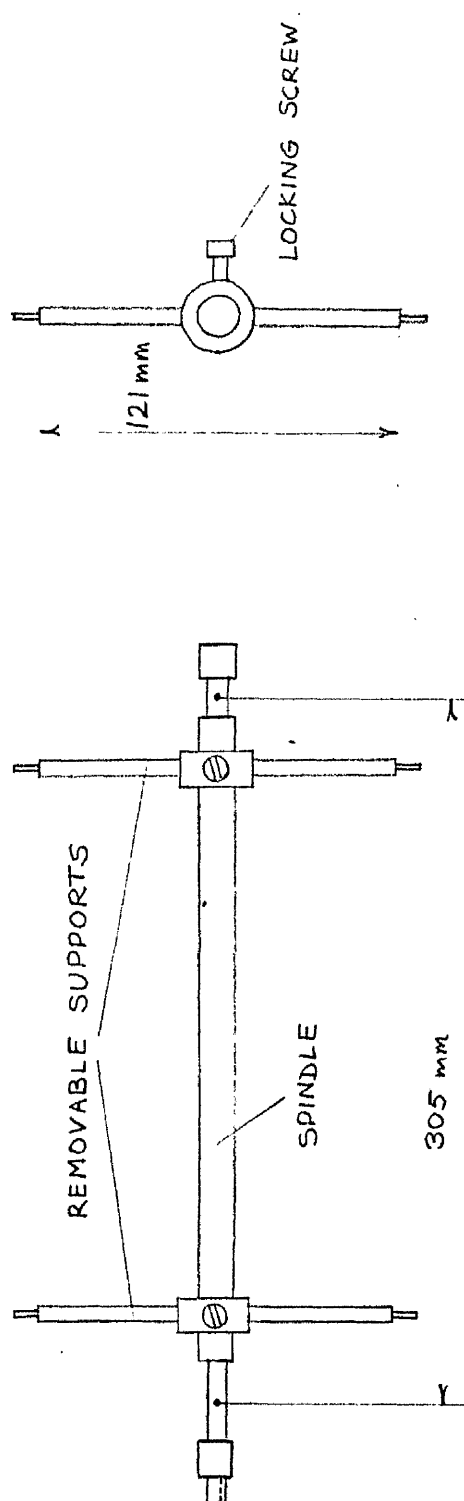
COMPLETE ASSEMBLY , INTERNAL LAYER REMOVAL .
